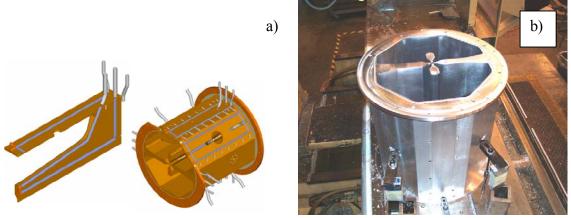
Segment details with cooling channels (a) and photograph of the aluminum cold model (b).
